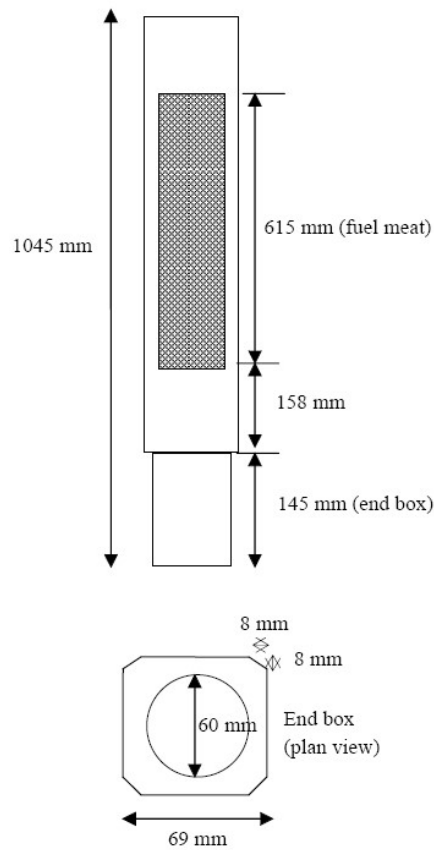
Fuel assembly showing the various axial sections and plan view of the end box.
